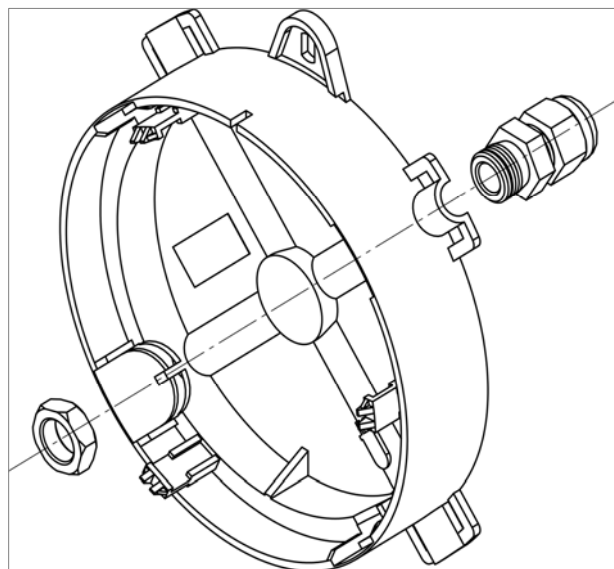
PG-40 base industrial footing and PG7 sealing gland main view
